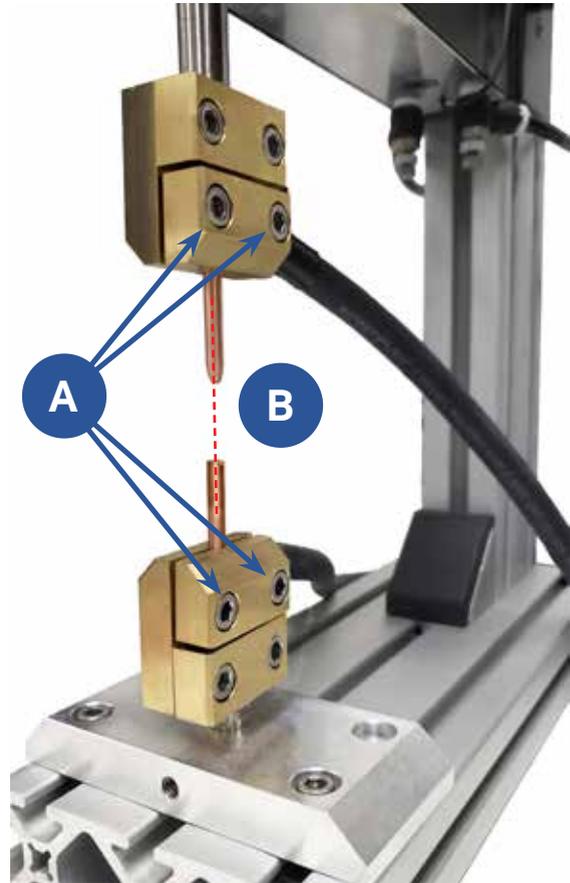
To insert the electrodes on a high force weld head, first loosen the bolts on the side of the electrode holders (A), then insert the electrodes making sure they are in vertical alignment (B). Then tighten the bolts on the side of the electrode holders (A).
